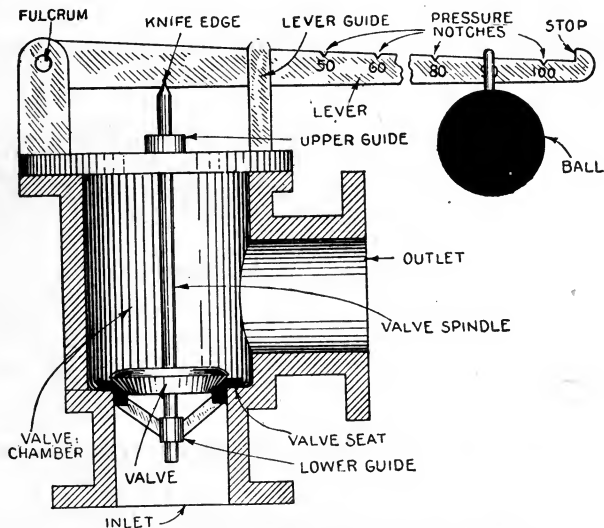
,685.—Sectional view of a lever safety valve showing essential parts.
